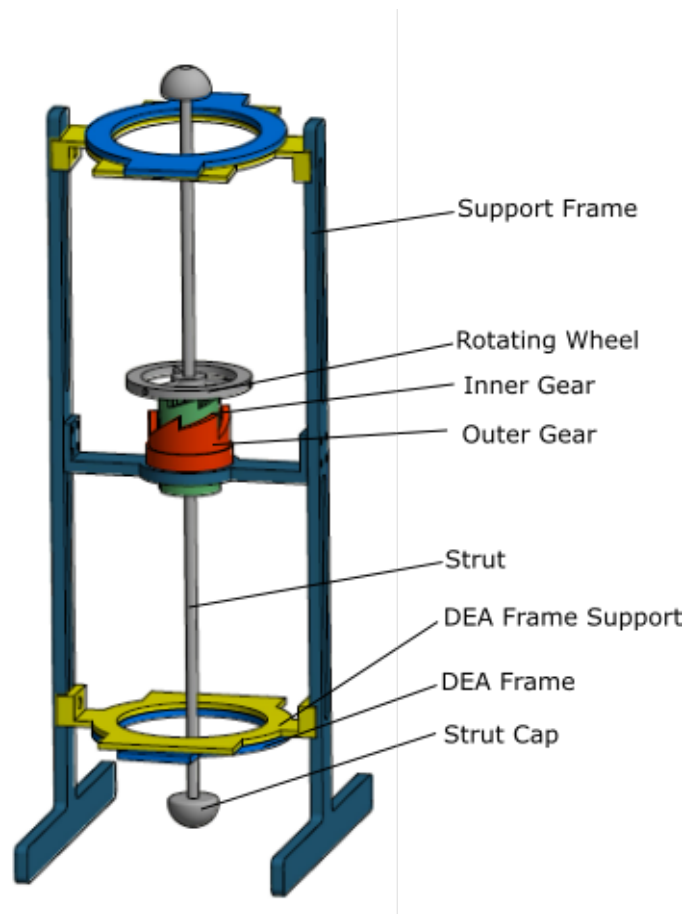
CAD desing of multi-state actuator prototype demonstration rig.
